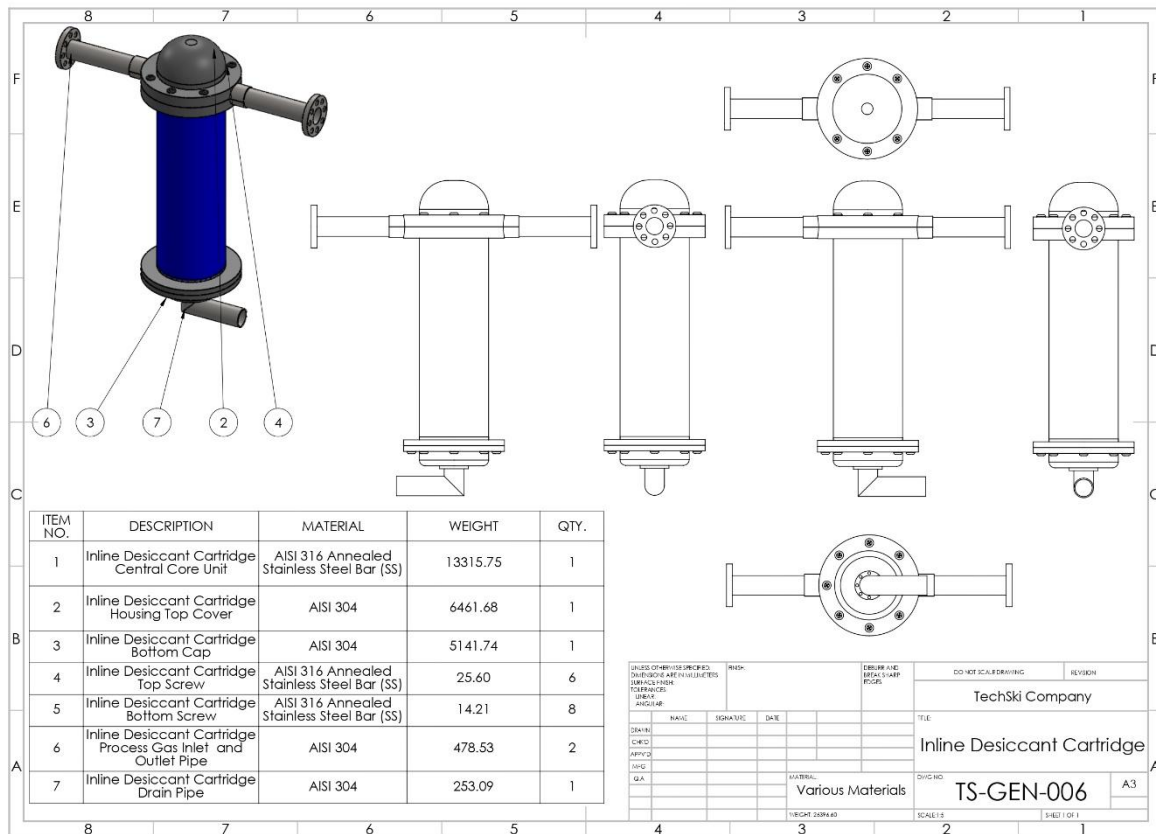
Inline Desiccant Cartridge Technical Drawing
